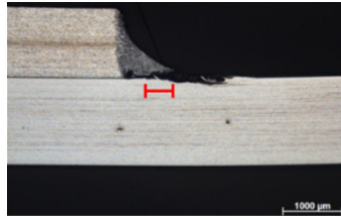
Cross-section of a dissimilar fillet weld of AA6016-T4 ( $t = 1.15$  mm) and 1.4301 ( $t = 1.50$  mm).
